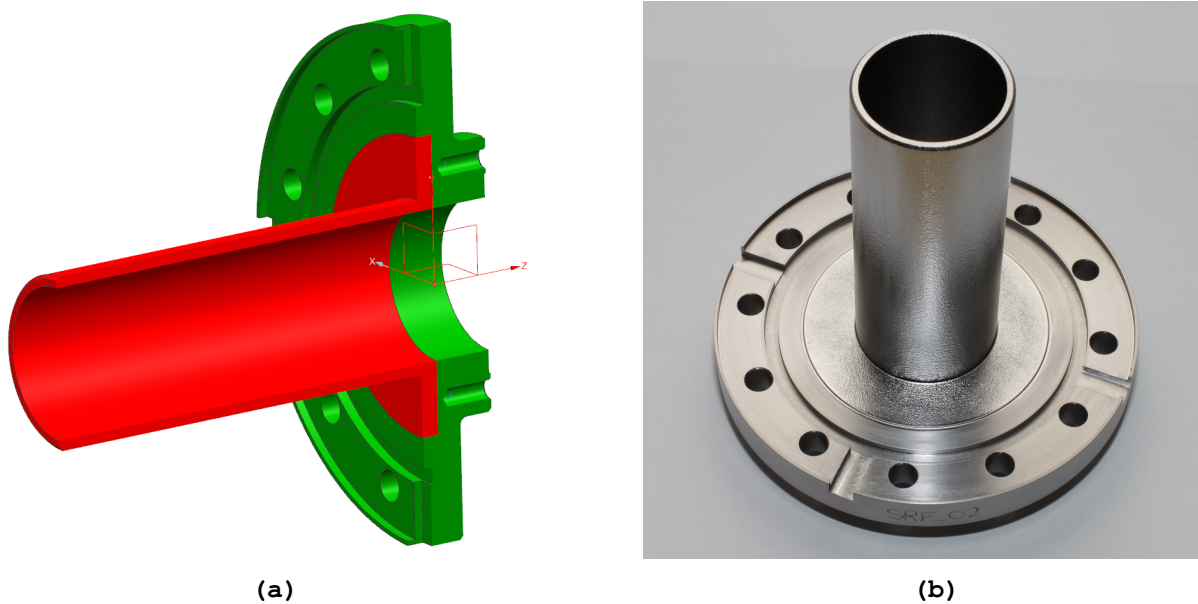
CAD model of the cylinder insert for the manufacturing. The Niobium part (RRR 47) is highlighted in red. The green section is made out of a NbTi55 alloy (By courtesy of D. Klinke) (a). Top view of the cylinder insert after the manufacturing (b).
